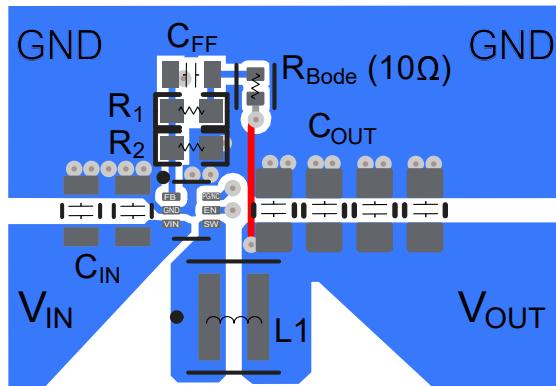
TPS62A0569 (SOT563) PCB Layout Recommendation
